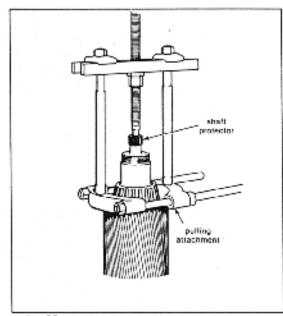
Pulling Bearing Cone from Pinion Shaft.
